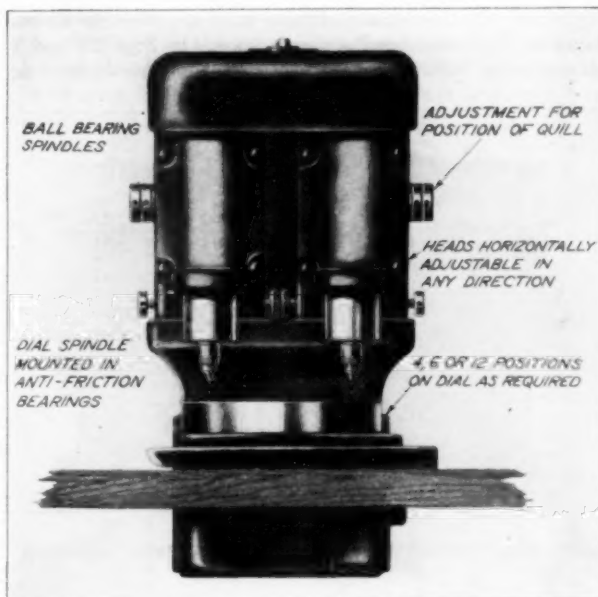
TWO-SPINDLE AUTOMATIC DRILLING MACHINE, BENCH TYPE, DIAL FEED, FRONT VIEW
